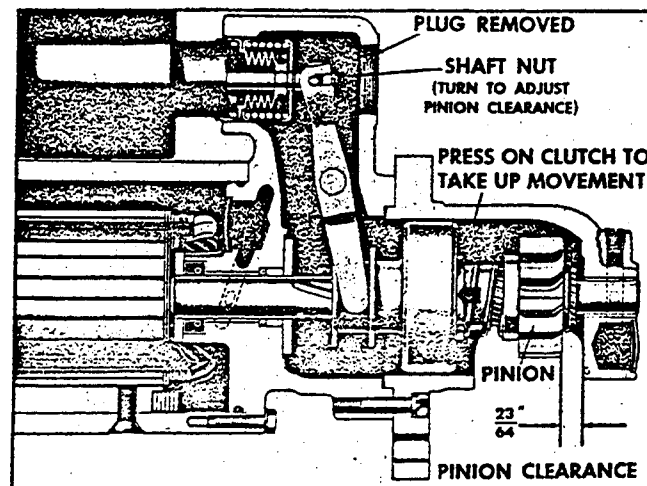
Checking pinion clearance on heavy duty clutch motor.
